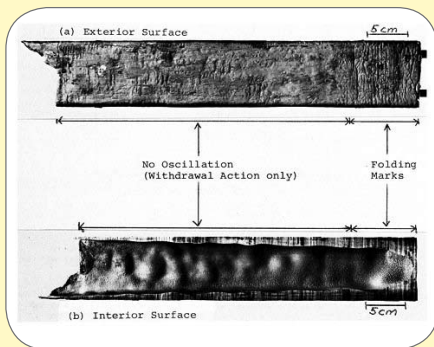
External and internal surfaces of a 0,17 % C-steel billet cast without mould oscillation [5,6].
